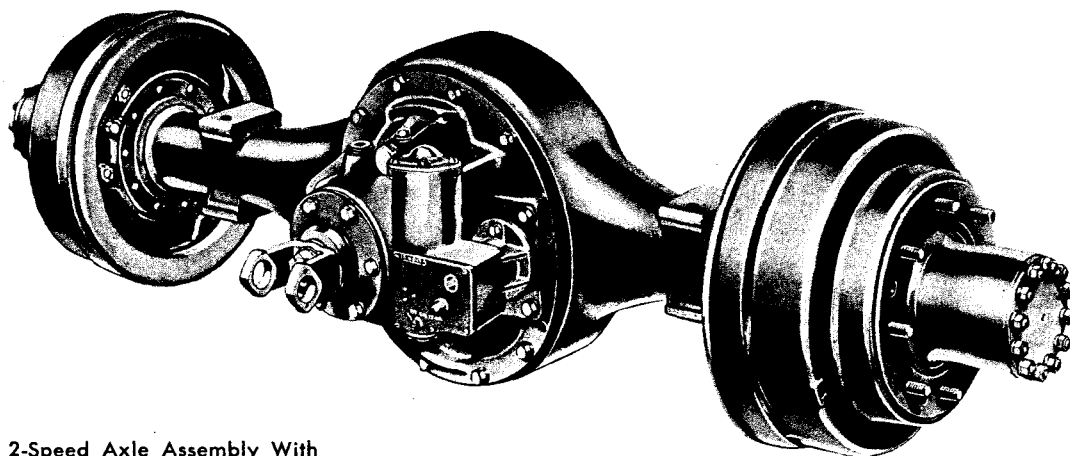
2-Speed Axle Assembly With Electric Shift Unit
